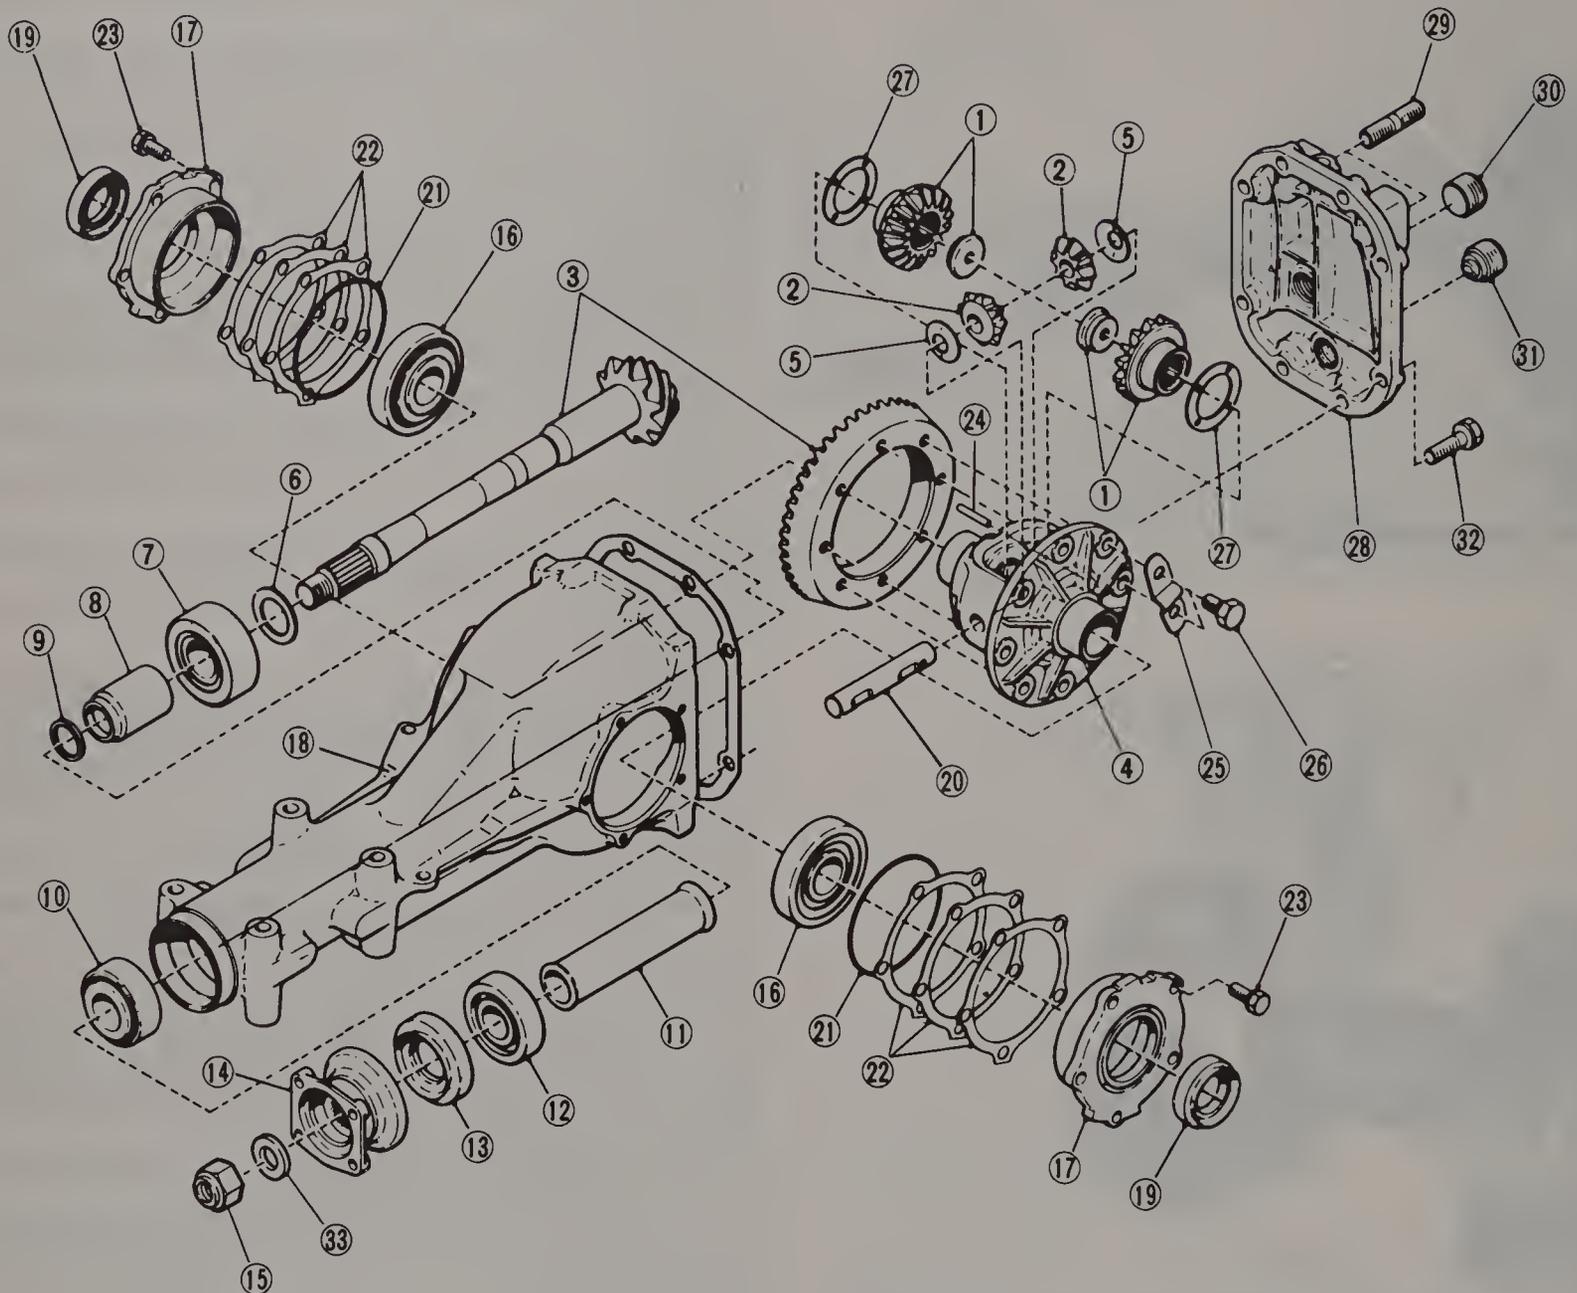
Rear differential components (4WD) – exploded view (Sec 10)
